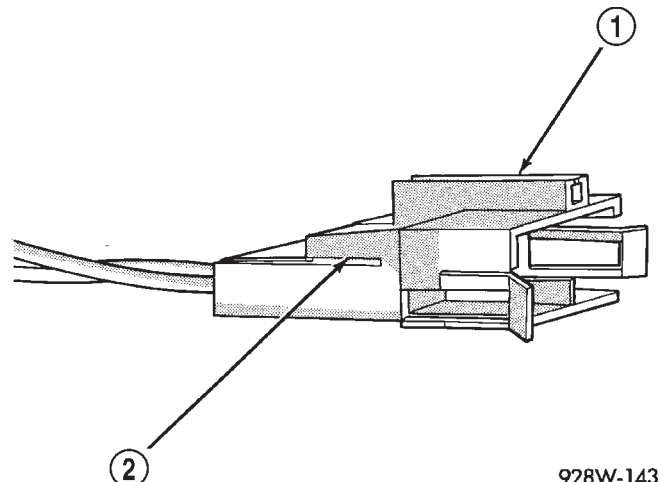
Using Special Tool 69321 - SPECIAL TOOL 6932
